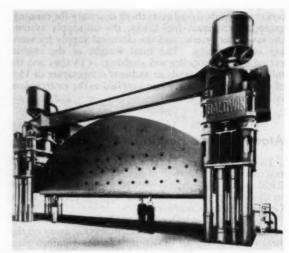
8000-ton hydraulic beam press, capable of bending steel plate 8 in. thick
